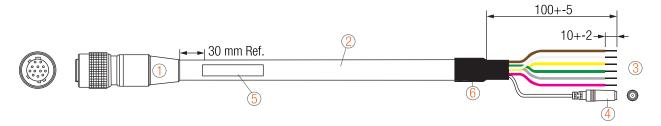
dimensional drawing MX161l203l245xG-SY-X4G3-xxx-MTP-WATERCOOLED
